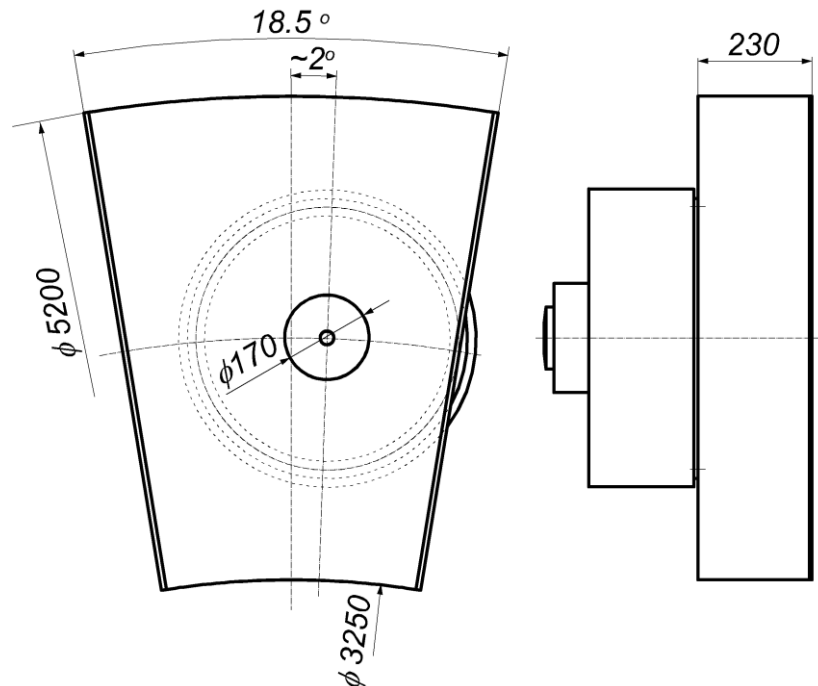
Itaipu thrust bearing pad and support arrangement [11].
